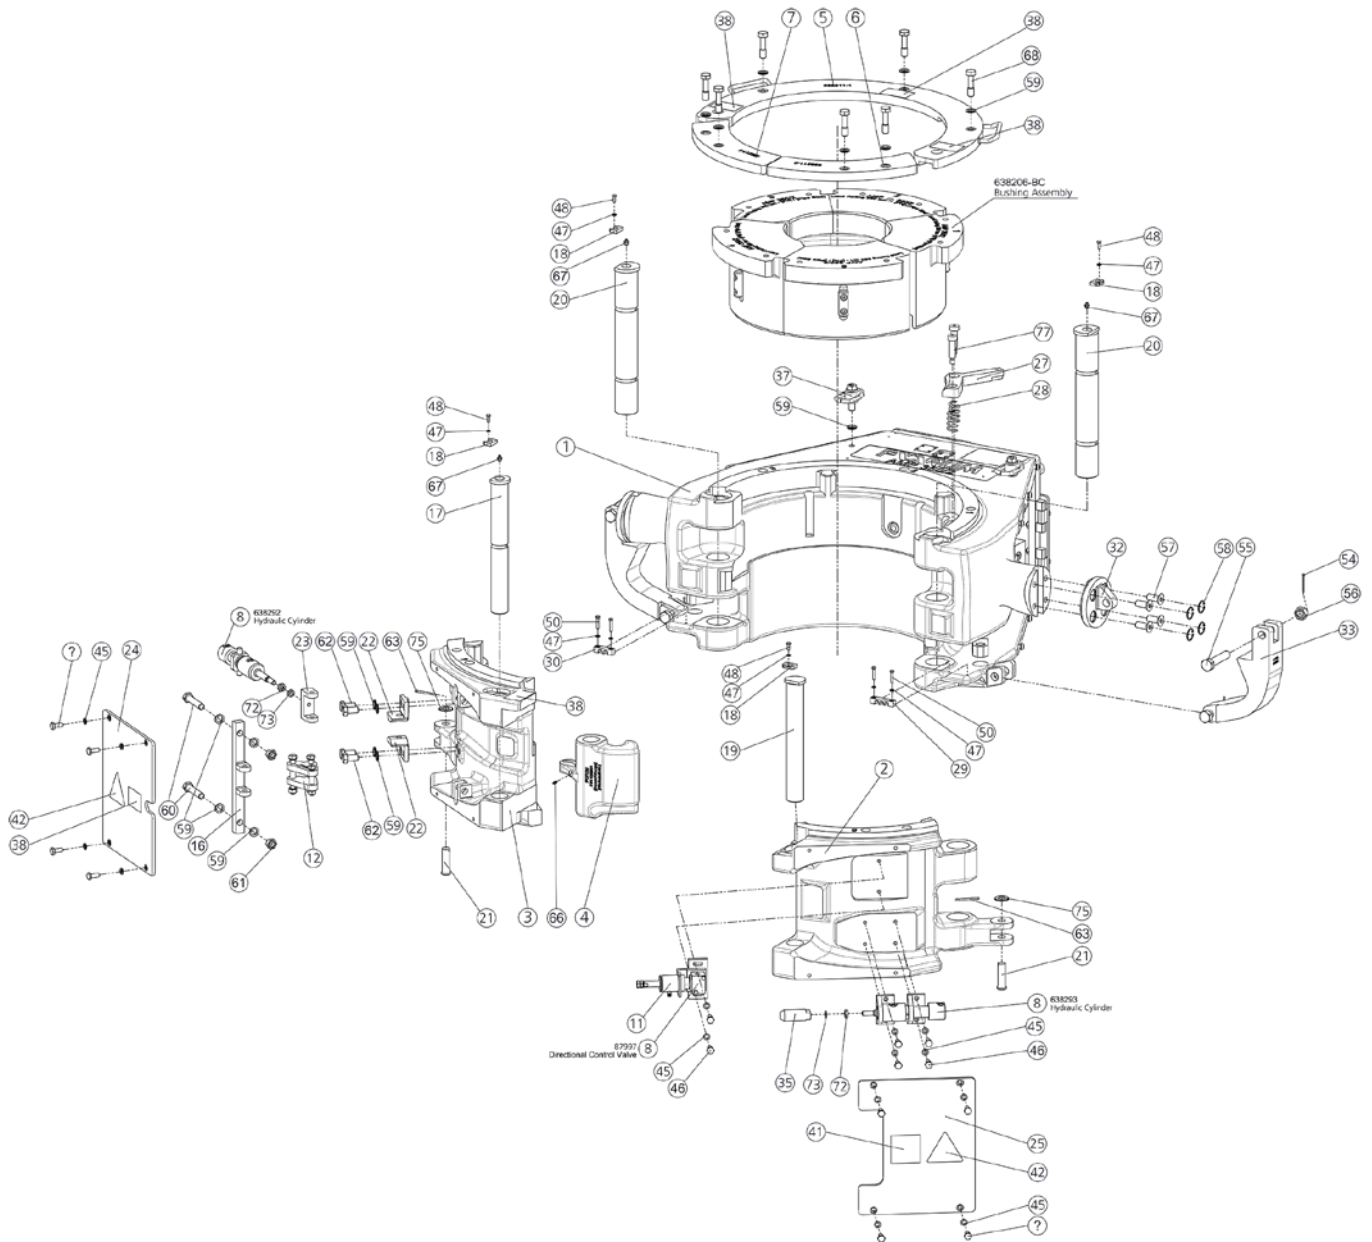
638200-Y AMP®-350/2 Drawing I
